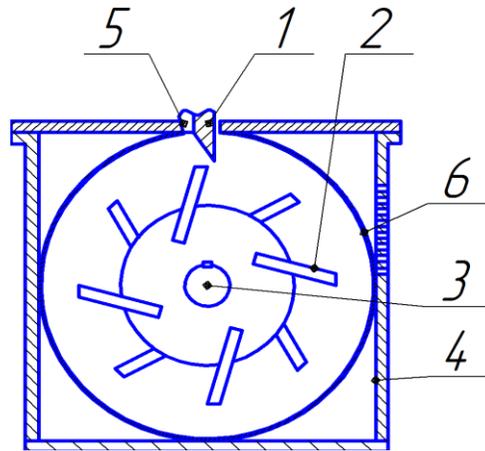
General appearance of the MR-4 laboratory rotary cutting mill (1 - stator cutter (cutting anvil); 2 - rotor cutters; 3 - shaft; 4 - machine housing; 5 - booting device; and 6 – separator)
